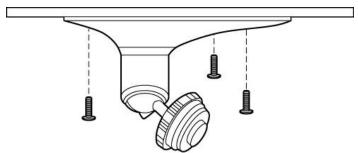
Screw Locations for Ceiling-Mount Installation
